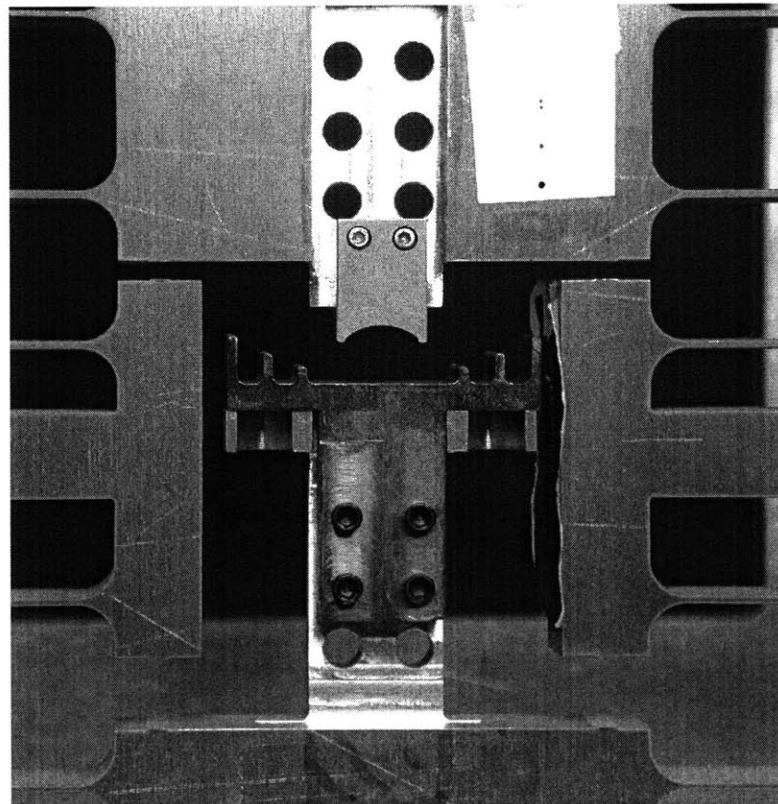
Multi-span bend fixtures installed in high load testing machine. Assembly is shown in Fig. 4-6
